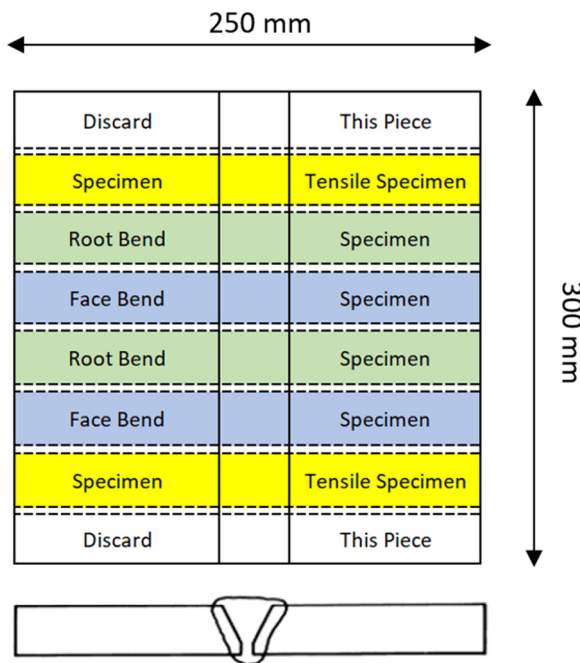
Sectioning of welded base material for test specimen preparation (ASME 2019)
